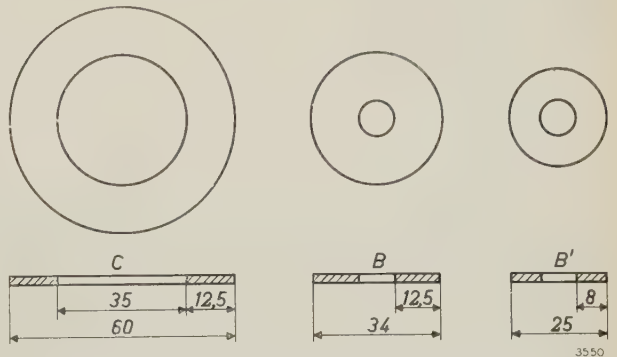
Dimensions of the outer ring C and two kinds of shaft rings B and B' used in the tests.
